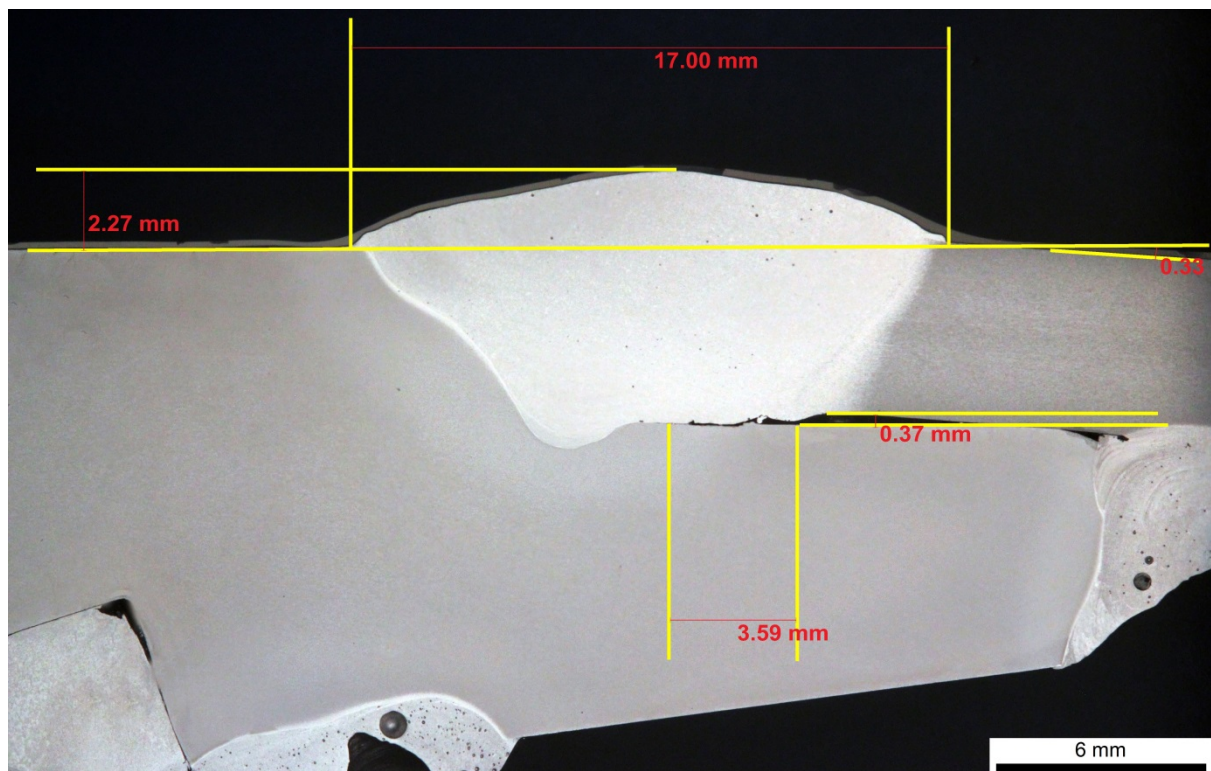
J3564 sample W05-06, slice 4, right hand side of Figure I60. Significant gas pore in the fillet weld between bulkhead and extrusion band.
